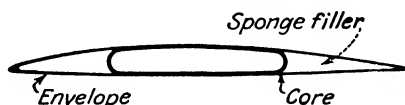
Section of steel blade. (*Hamilton Standard Propellers.*)
